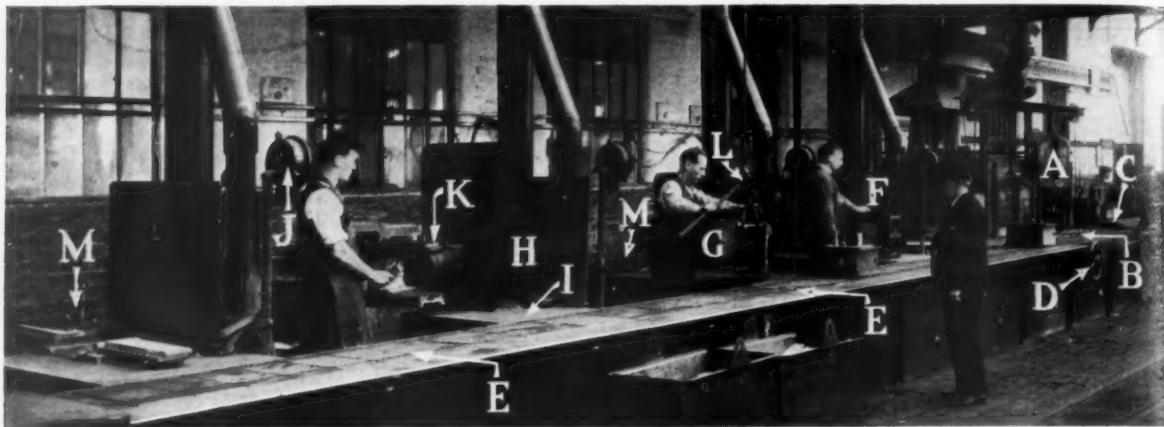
Range of furnaces with roller conveyor in front for transferring axleboxes
